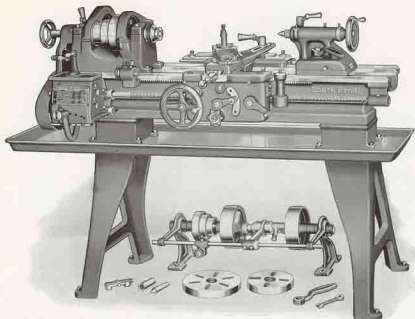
Cat. No. 8011-A, 11" x 4' Series "R" Tool Room Quick Change Gear Countershaft Drive Lathe complete as shown. \$637.00
